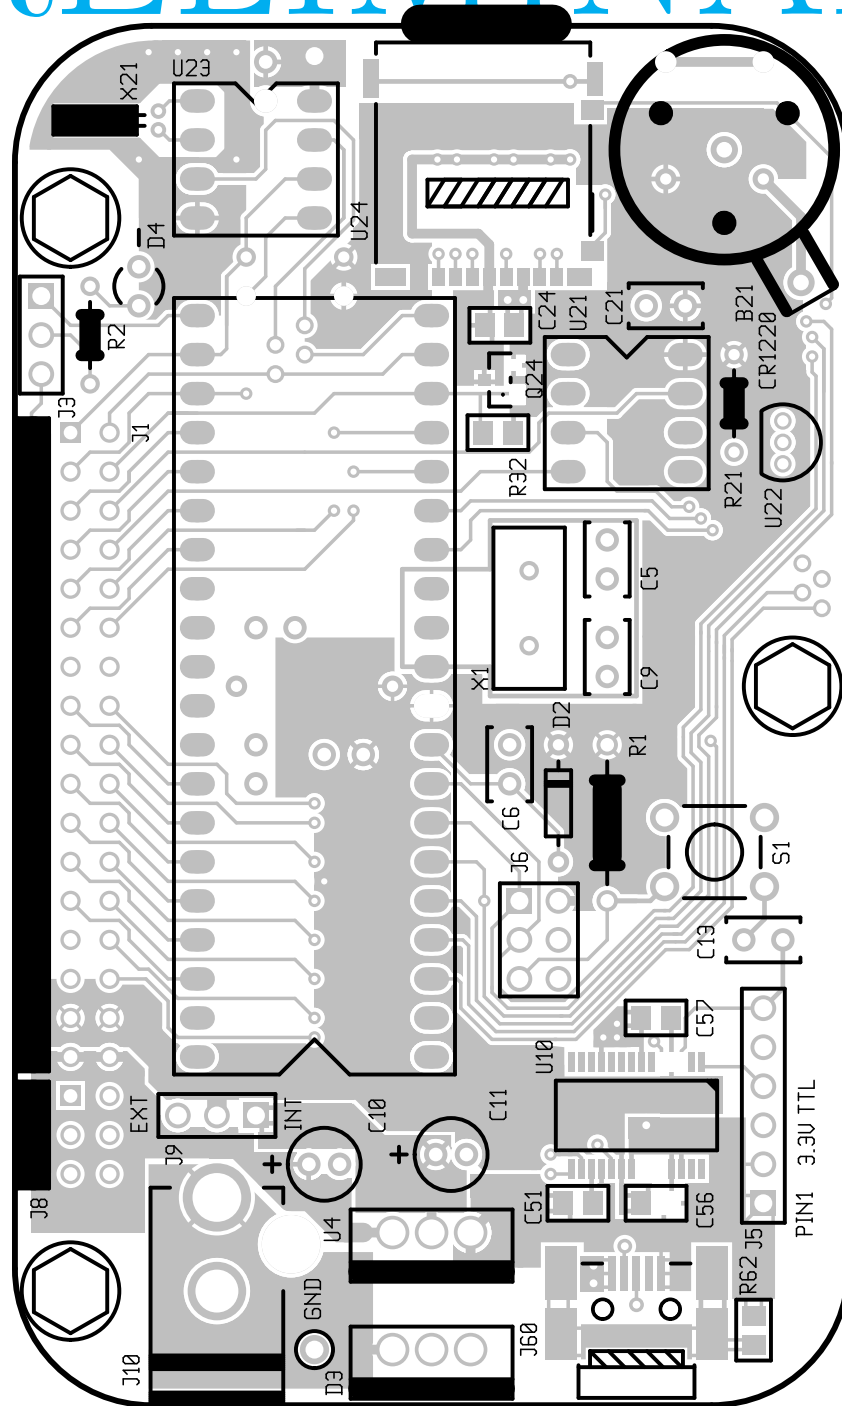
NB2AS Top Side Assembly Drawing (Rev 1)
